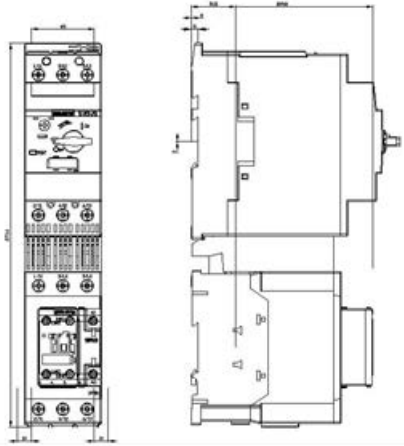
Example: Dimension drawing of a motor feeder combination (motor starter protector and contactor)
